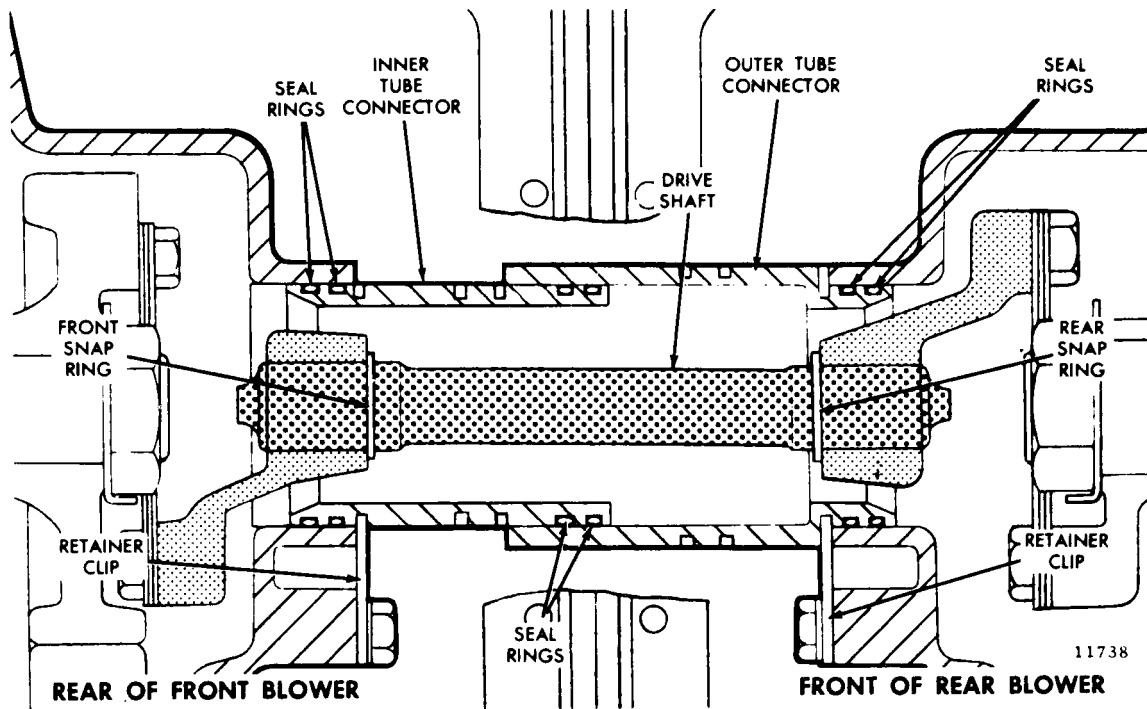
Tandem Blower Drive Shaft and Coupling Installation
